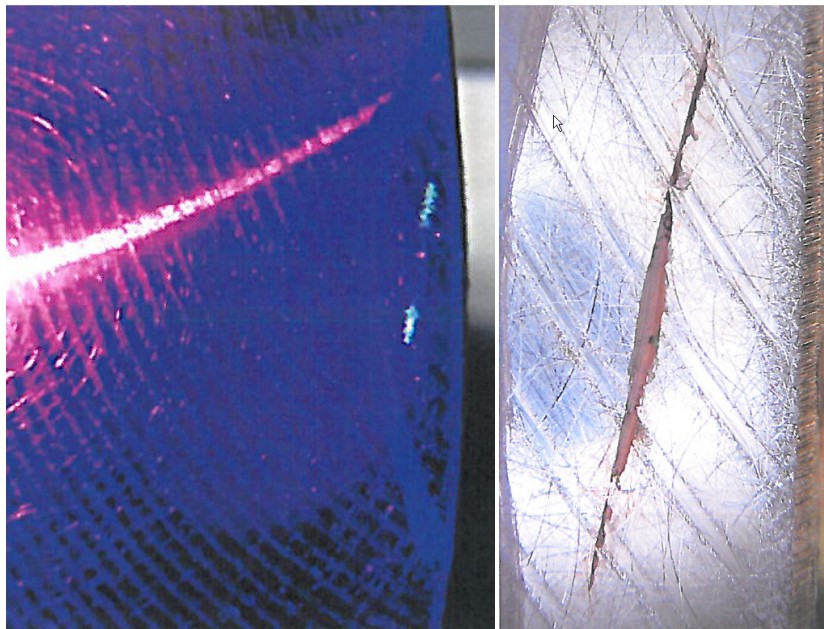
A copper lid ingot prior to fluorescent penetrant inspection with the envelope surface remaining as casted, whereas the end surfaces of the ingots were machined.
